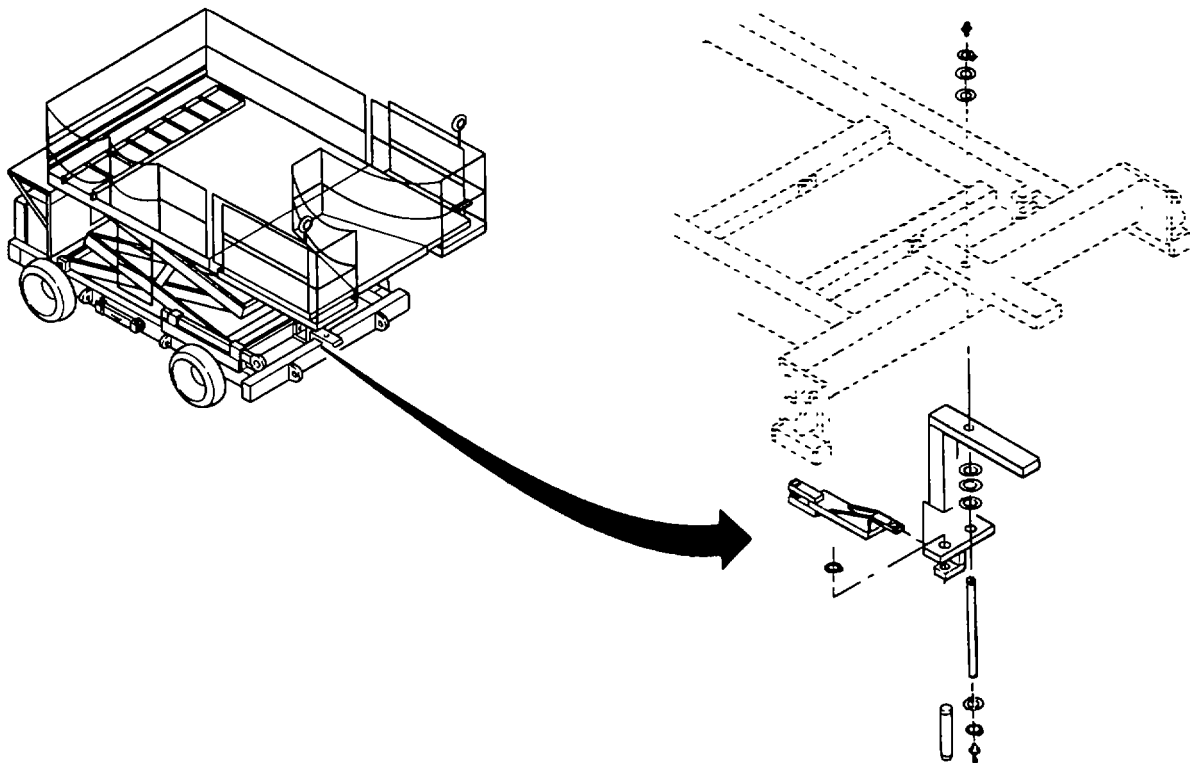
Towing Assembly (Sheet 1 of 2).
